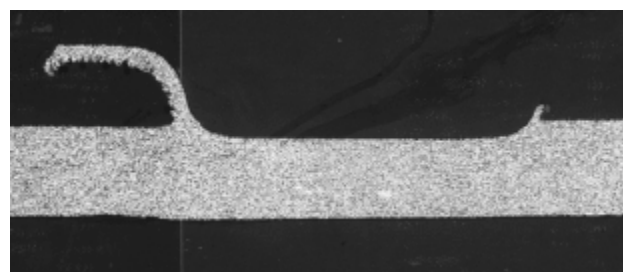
Cross section through an aluminum-SiC metal matrix composite weld joint processed through friction stir welding
